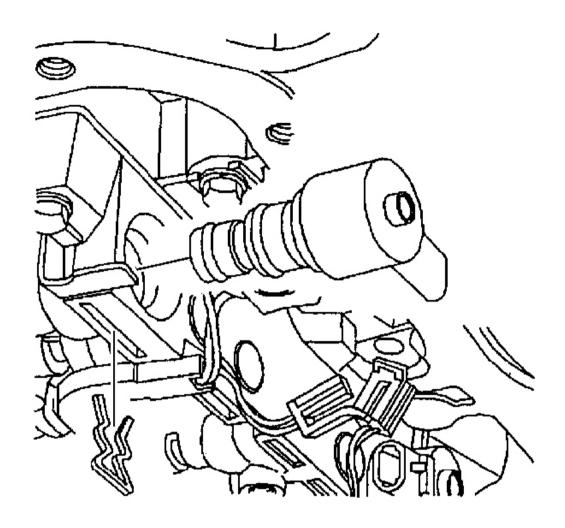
Installing The TCC PWM Solenoid To The Control Valve Body Courtesy of GENERAL MOTORS CORP.
